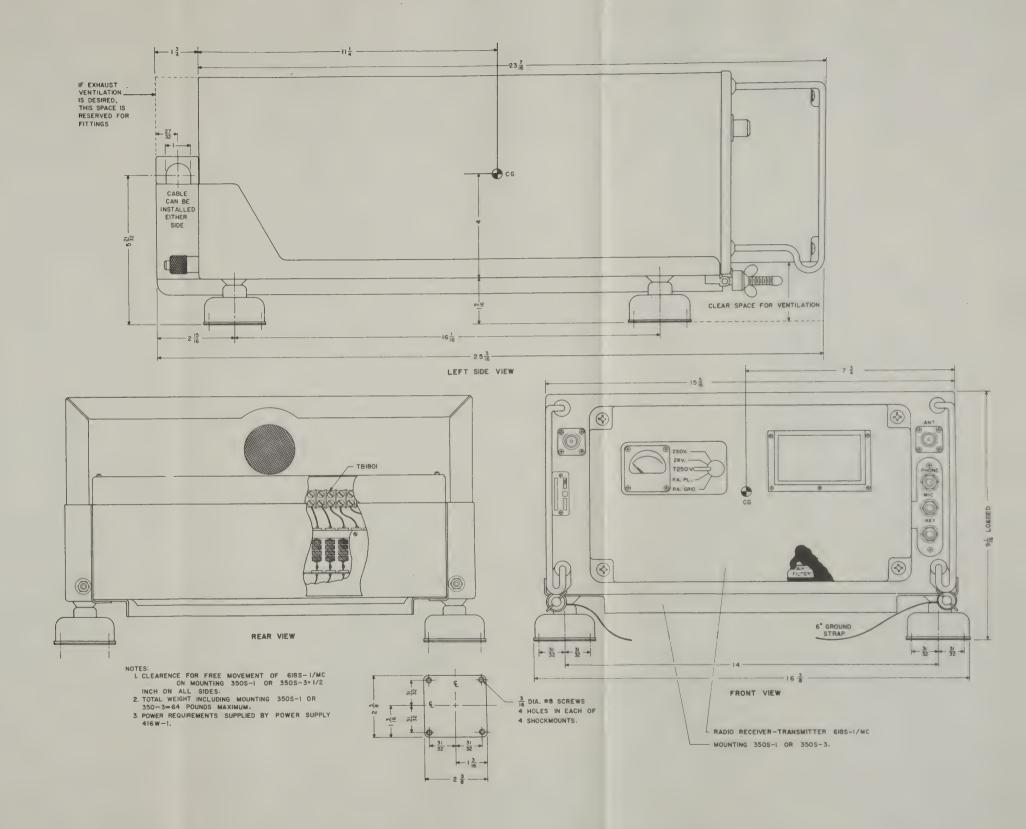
Outline and Mounting Dimensions, Receiver-Transmitter 6185–MC
